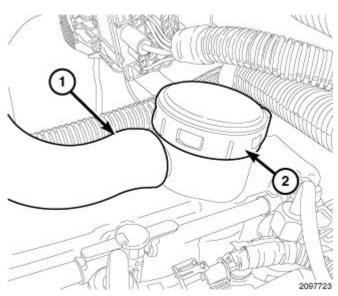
Oil Separator Cover Courtesy of CHRYSLER LLC
